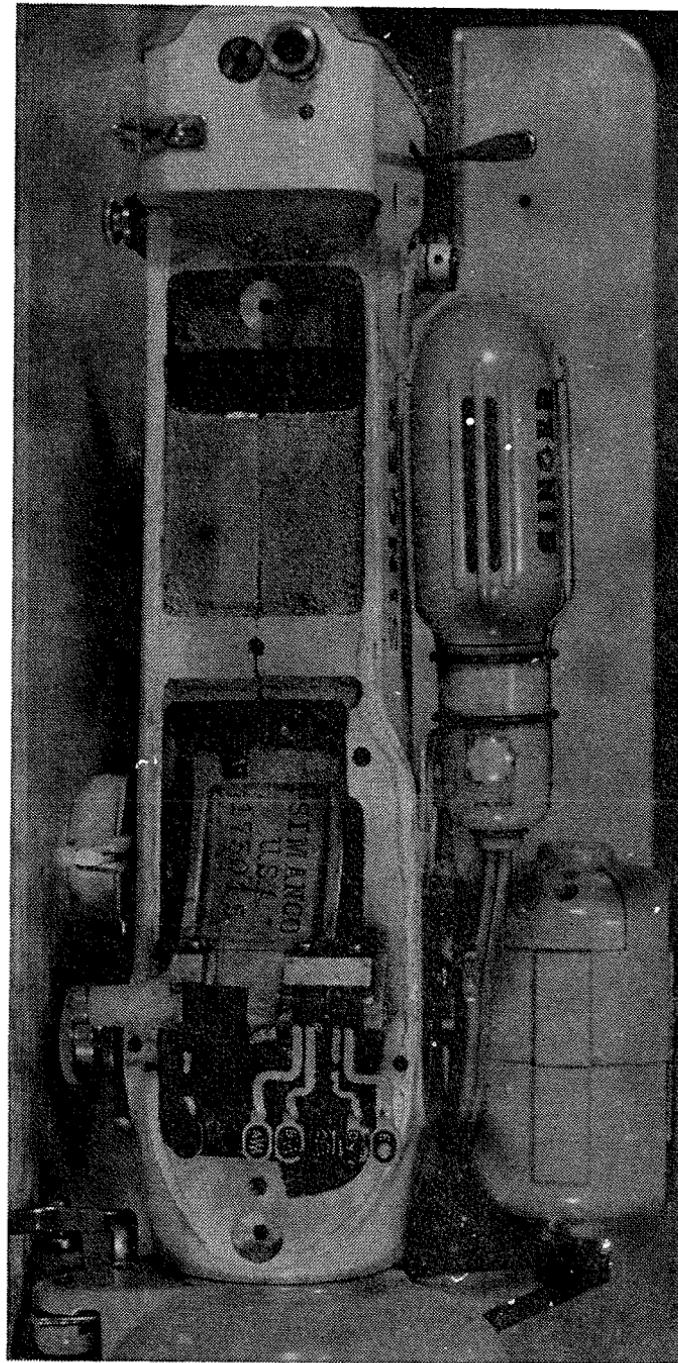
This a view under the top of the upper arm cover (cover removed) on the Singer Model 319W. On most zig-zag machines, removing the top cover will give you access to the zig-zag mechanism.
